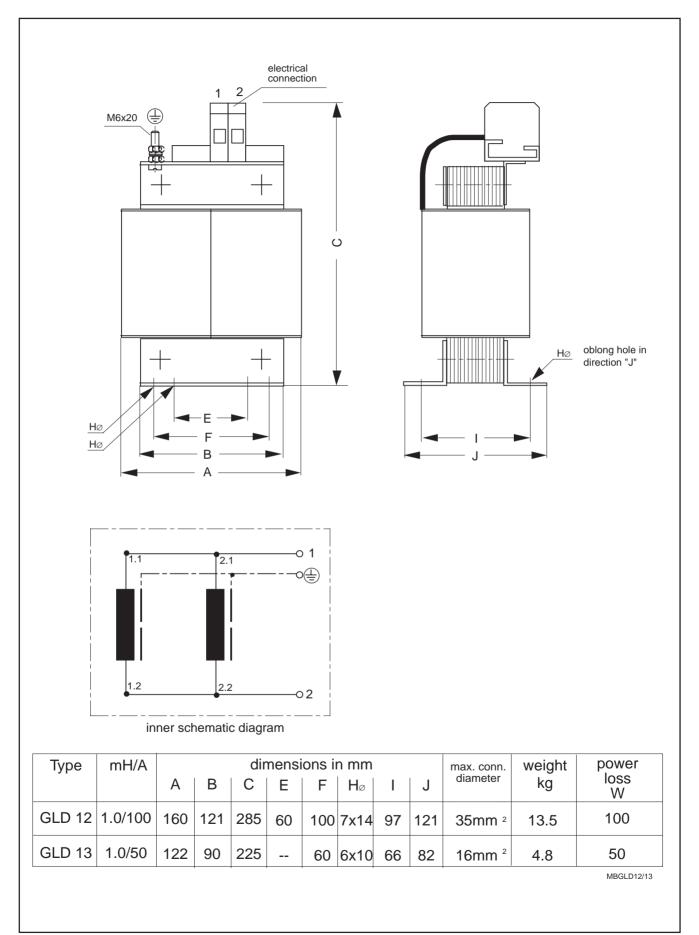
GLD 12/13 smoothing choke - dimensional data
